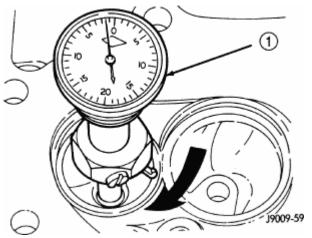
View Of Dial Indicator Courtesy of CHRYSLER LLC
